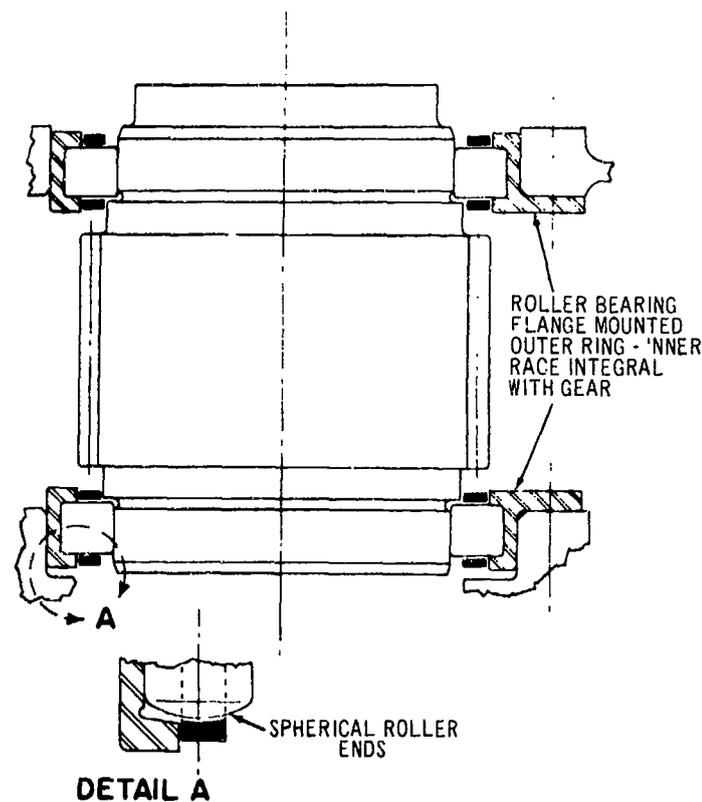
Pinion Gear Support Rollers With Integral Inner Raceways
